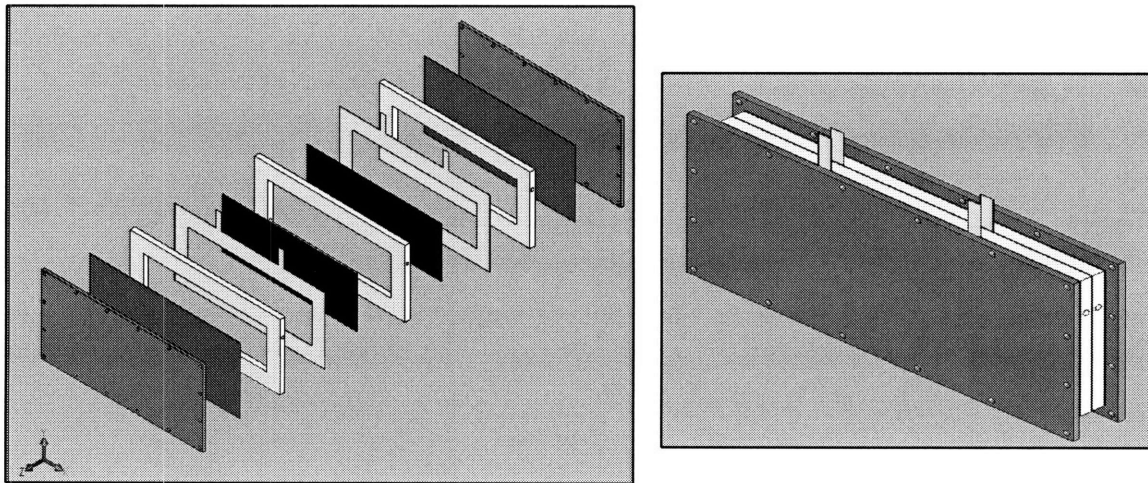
CAD model of the three channel setup (exploded view – left; isometric view - right). The parts clearly visualized are: polypropylene sheets (purple); rubber gasket (brown); aluminum foil (yellow); polypropylene channel frames (white); carbon aerogel (black).
